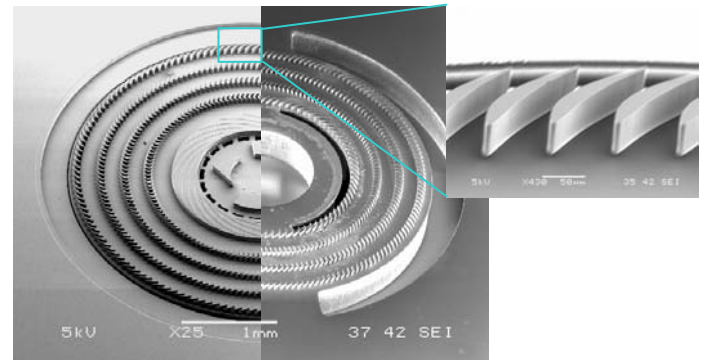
Microturbine rotor and stator: left side is the rotor and right side is the stator. Zoom in picture shows the characteristic 2D shape of micromachined blades using DRIE.
